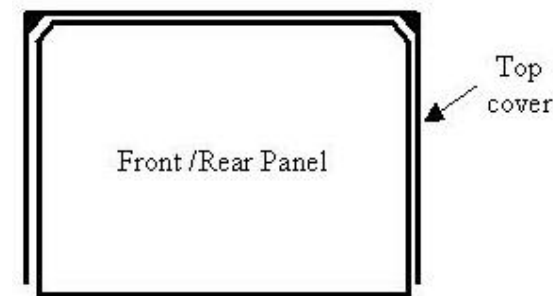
Bevelled Front And Rear Panel Corners Provide Clearance For Top Cover Solder Beads
